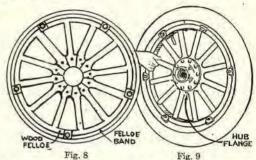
Wood wheel without hub flanges, but with rim mounted.
